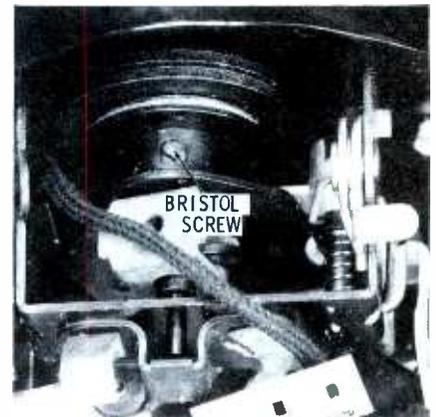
Bristol screw engages pickup-raising shaft to reinstall pickup arm.
